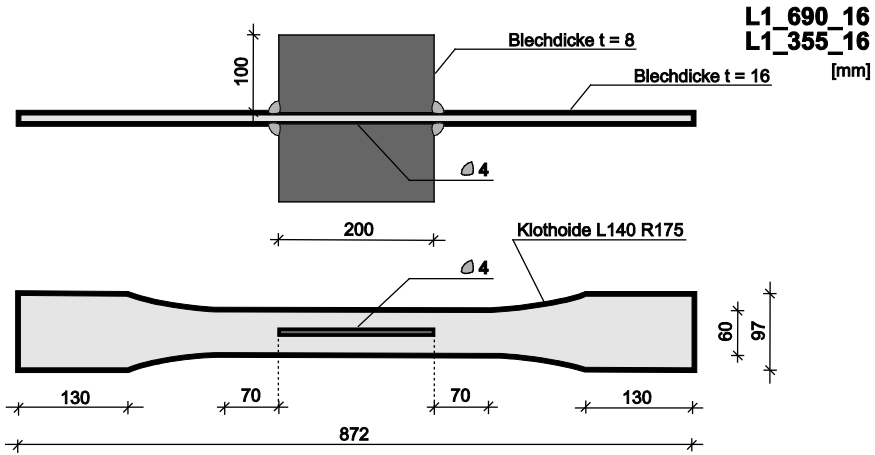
Steel S690QL. Specimens - Geometry and measurements.
